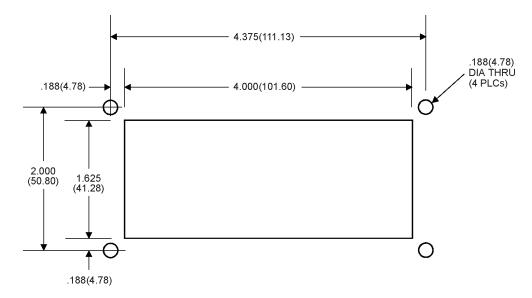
Front Mounted Connectors Cutout Dimensions
